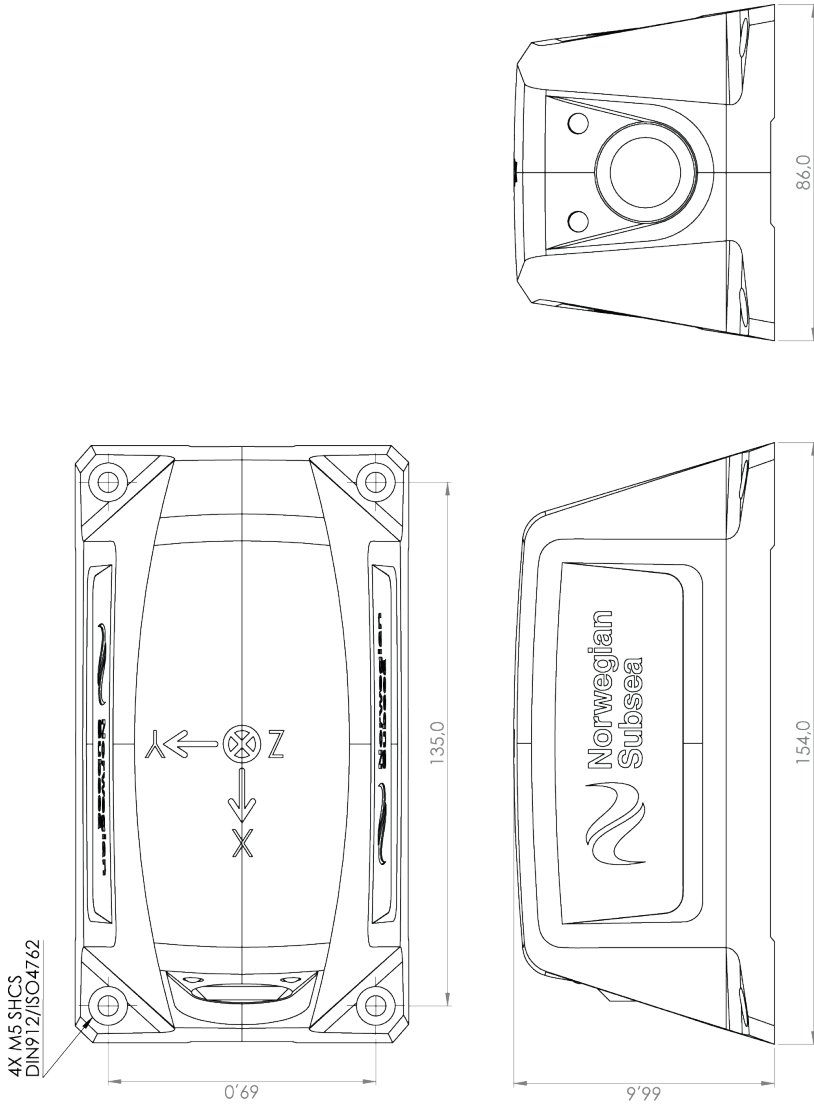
MRU Marine / MRU Marine H technical drawings: top, side, front views.
